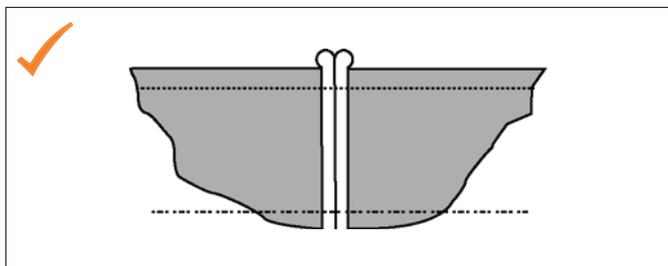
Butt-weld with big welding beads (acceptable)
